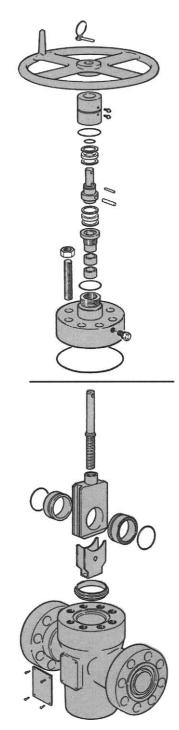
High pressure forged conduit gate valve *Courtesy of Anson Ltd
